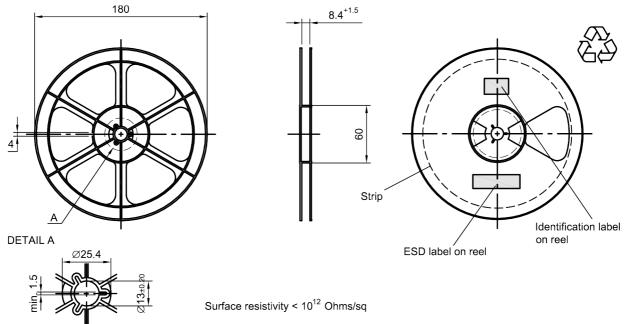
Drawing of reel (first-angle projection) with diameter of 180 mm.
